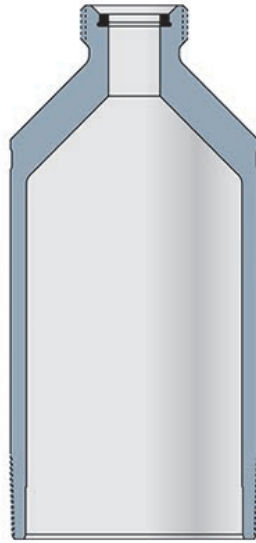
Top Drive Cement Head for Launching Short Fin Cementing Plugs
